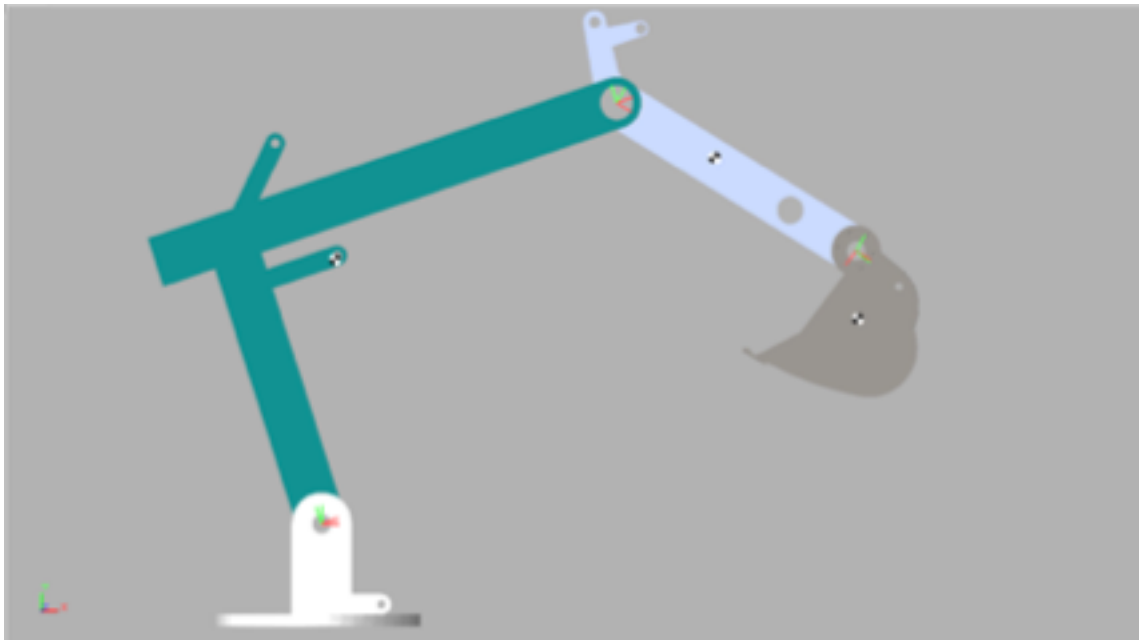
Four-link serial open-chain linkage assembled using links from above figure
